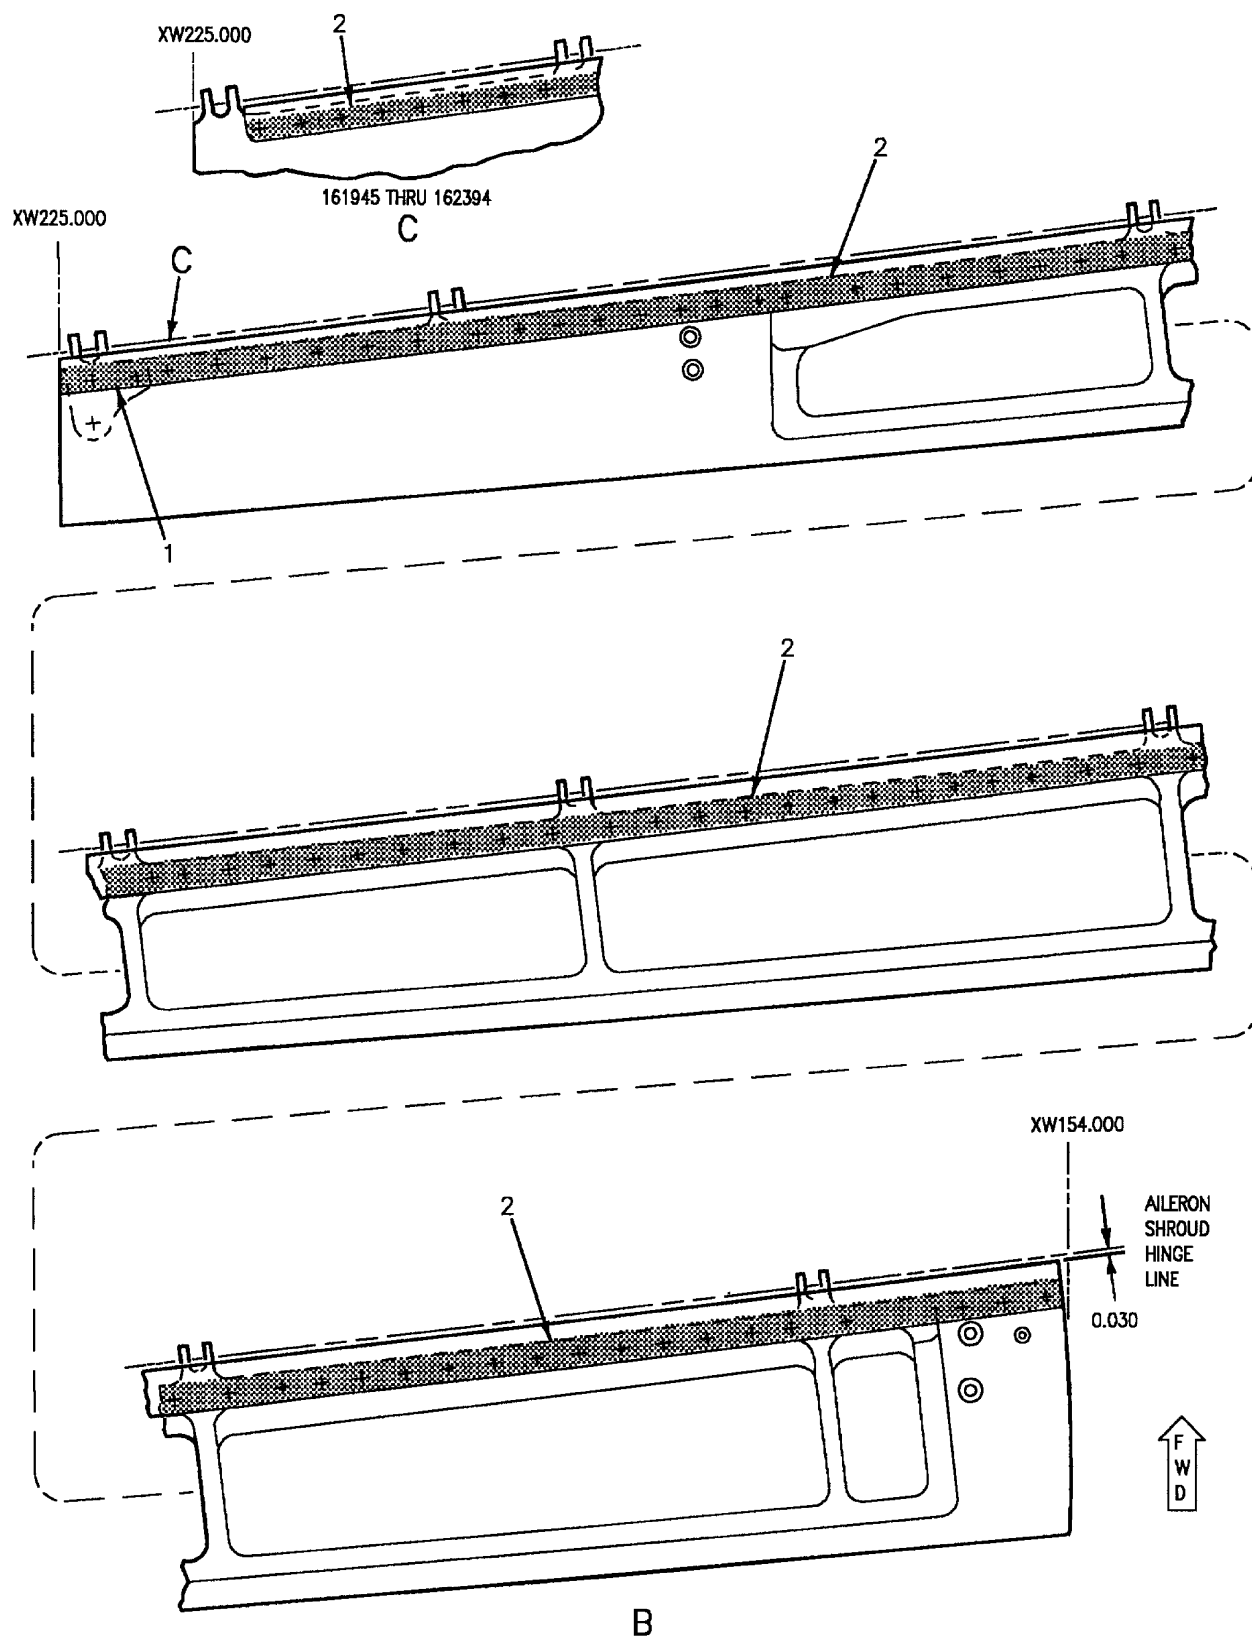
Wiper Seal, Aileron Shroud (74A170759) (Sheet 2)
